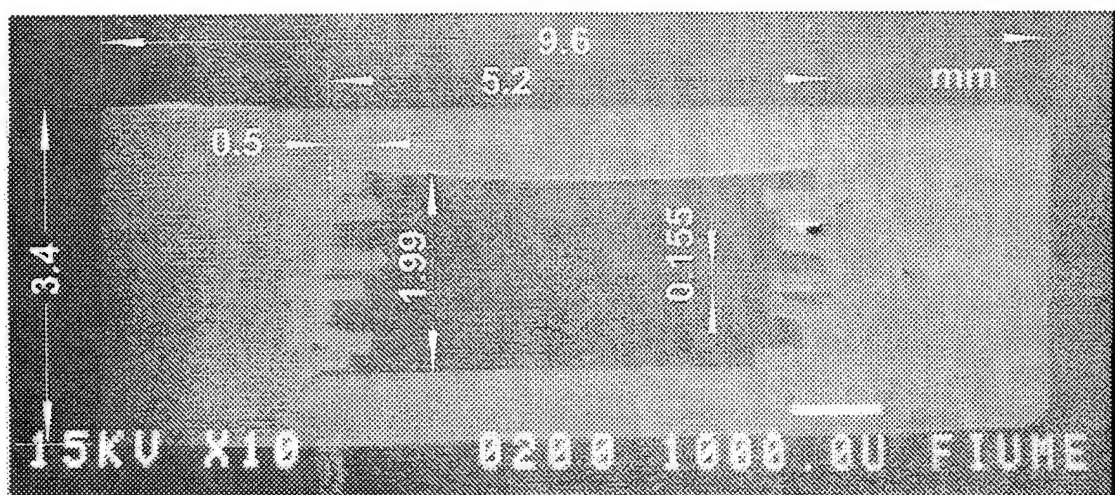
Cross Section of Sidewall-Grooved Ceramic Heat Pipe
